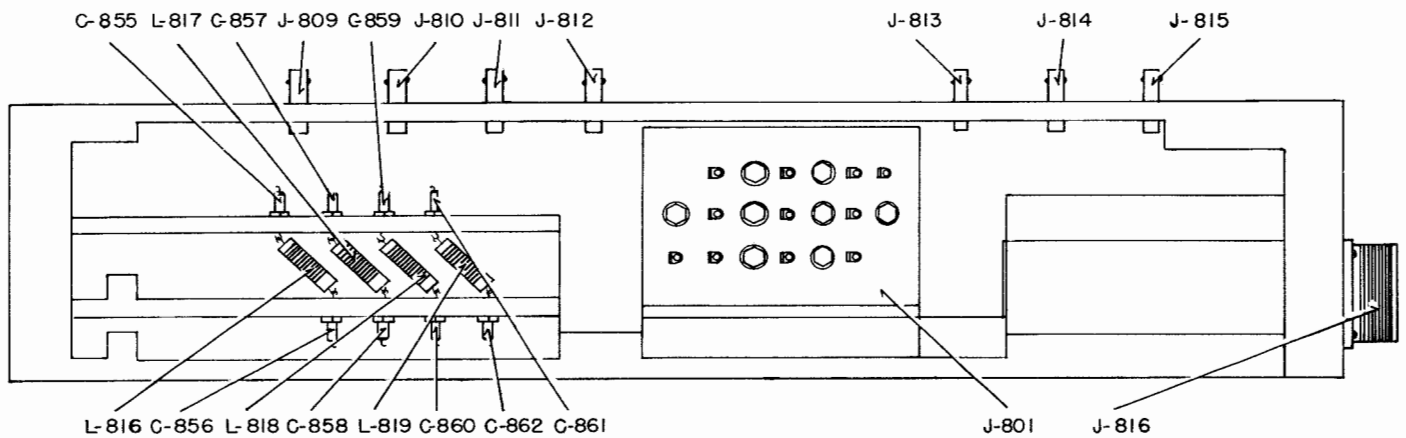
Component Locations Inside of R.F. Filter Compartment, Oscillator Assembly O-131/FRR-24
